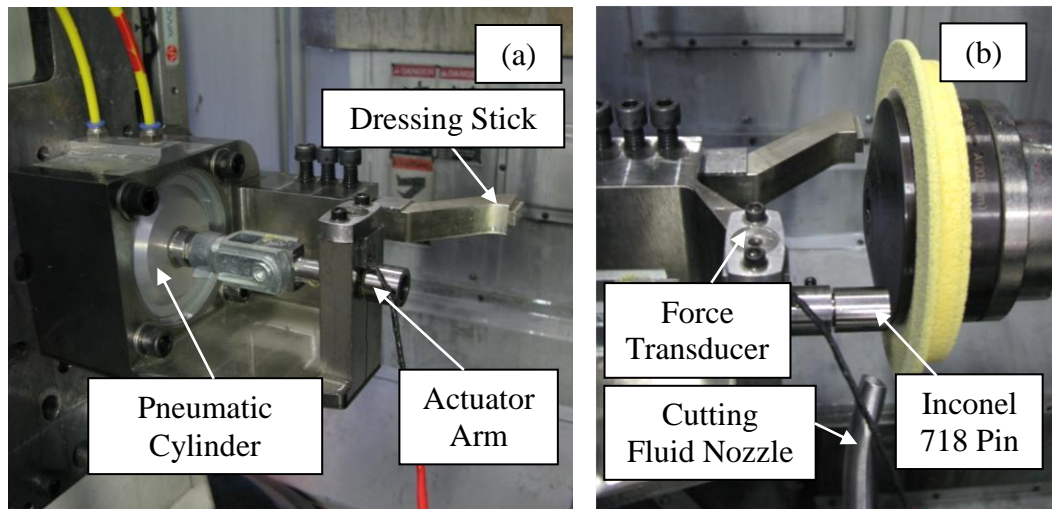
Pin on disc setup on Makino A99 machine tool; (a) Setup overview and (b) Close up image highlighting Nickel Pin and Grinding wheel.
